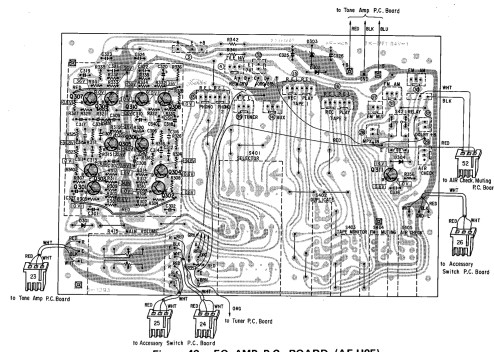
EQ AMP P.C. BOARD (AF-H05)
